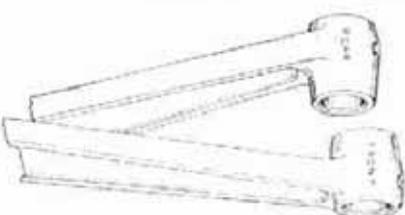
ARRANGEMENT OF TWIN CONNECTING RODS.
